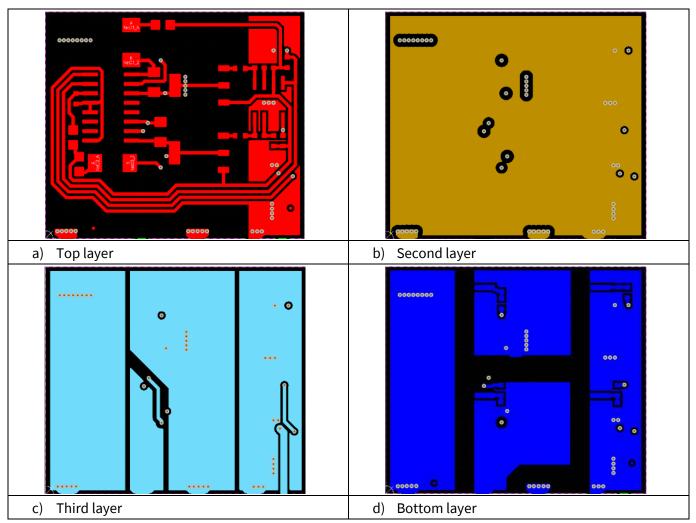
Active-bridge daughter card PCB layout: a) top, b) second, c) third and d) bottom layers
